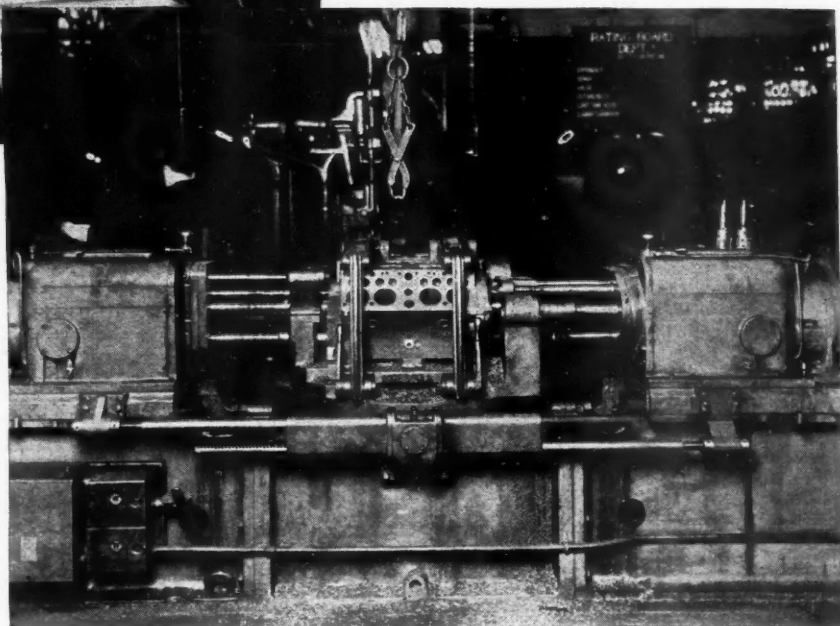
(below)—Double-end Ingersoll boring machine for boring Oakland V-8 crankshaft, camshaft water pump and lifter shaft holes
